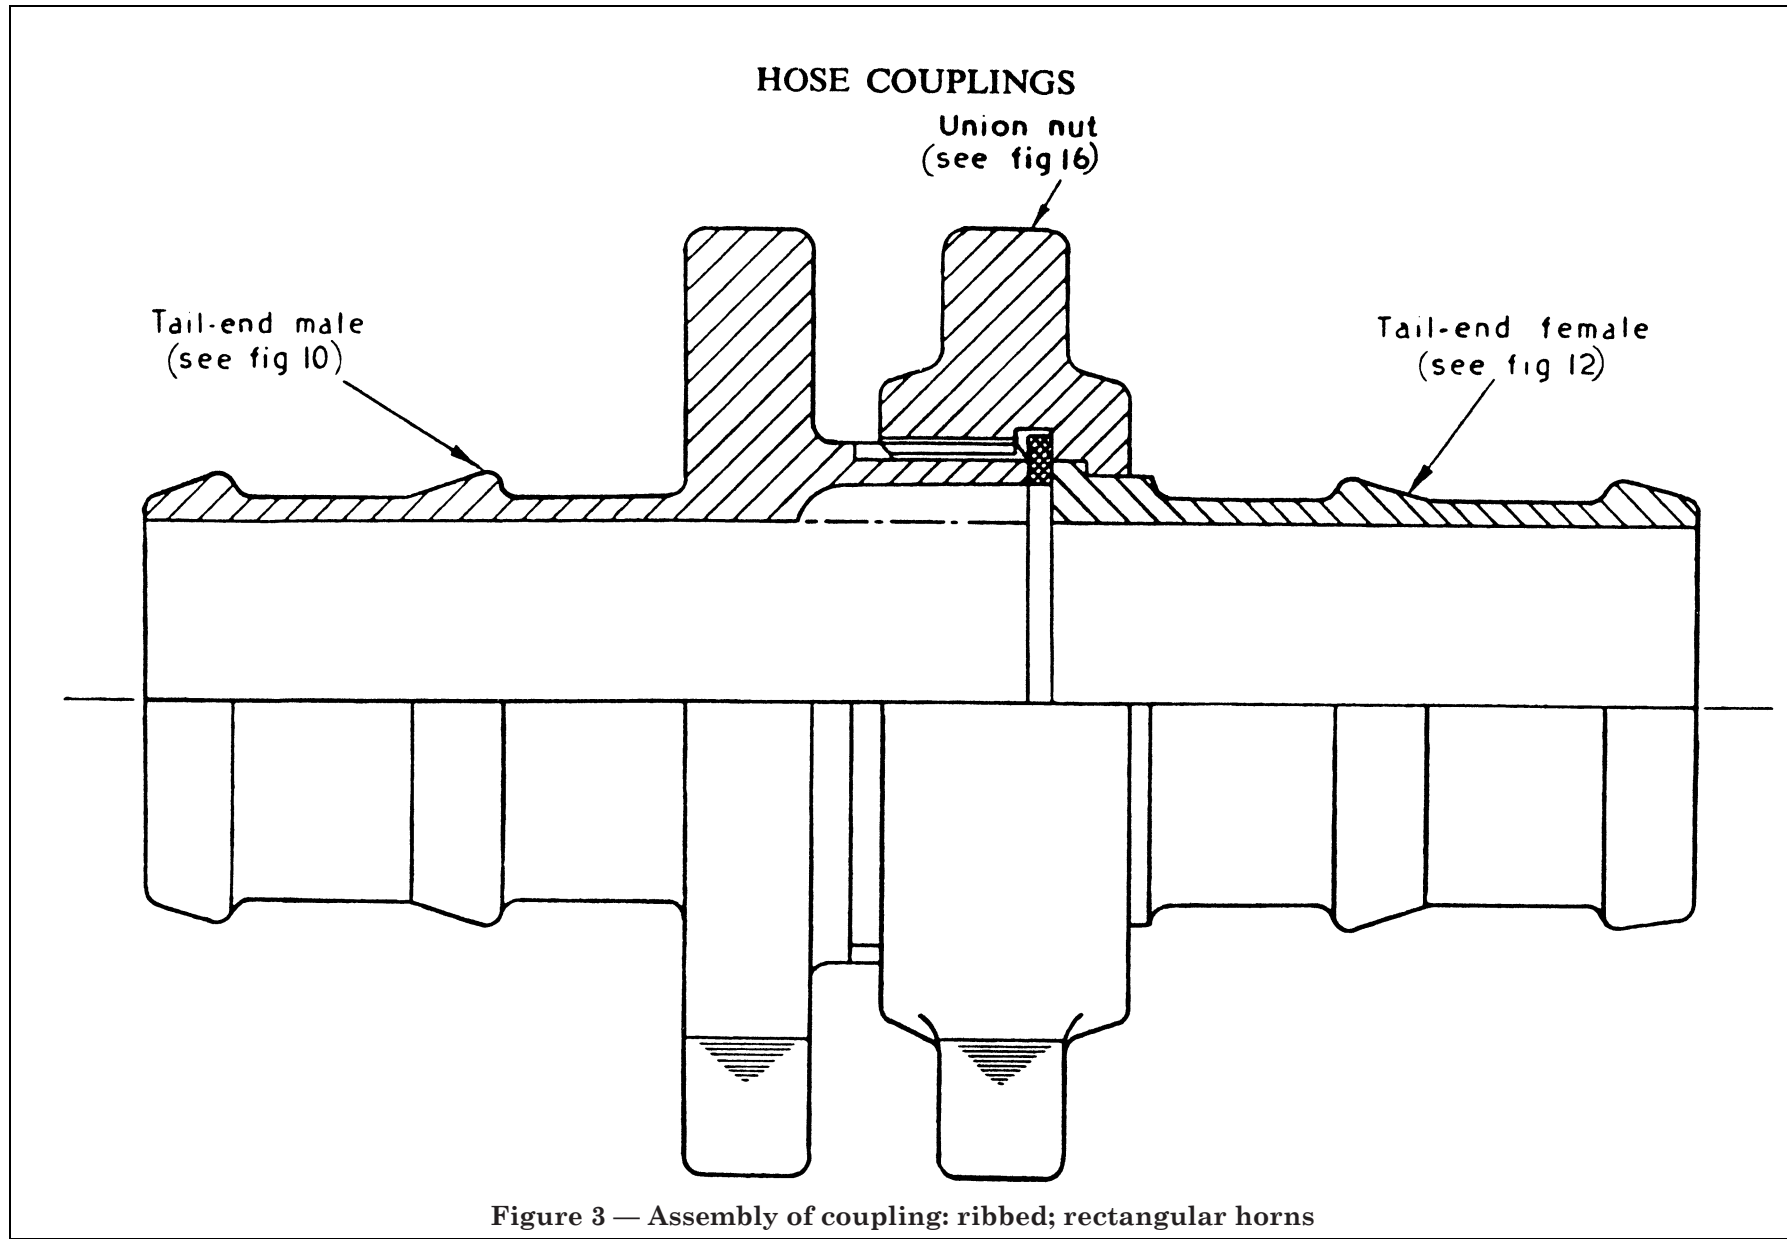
Assembly of coupling: ribbed; rectangular horns
